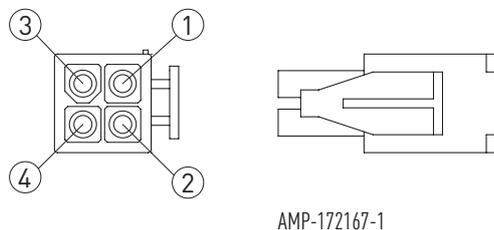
Connector assignment without brake, motor connectors for 50 W – 750 W motors
